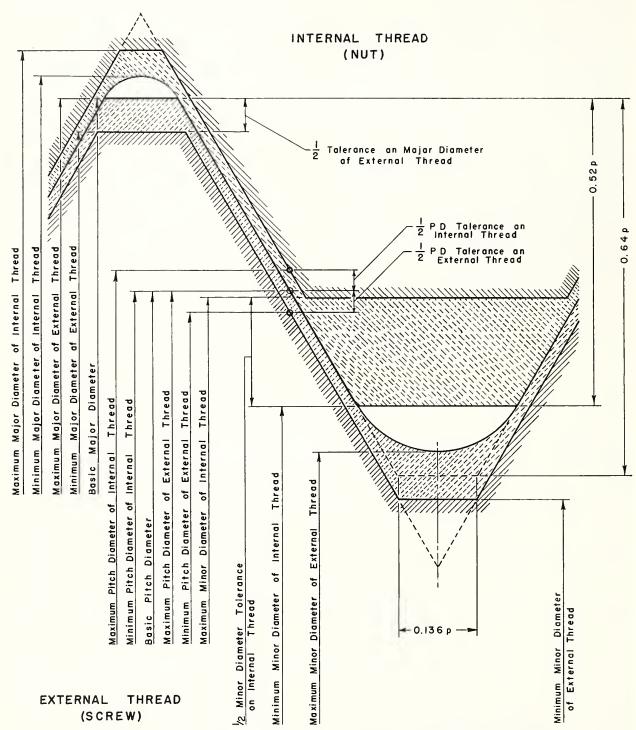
Disposition of tolerances and crest clearances, National Miniature threads.
